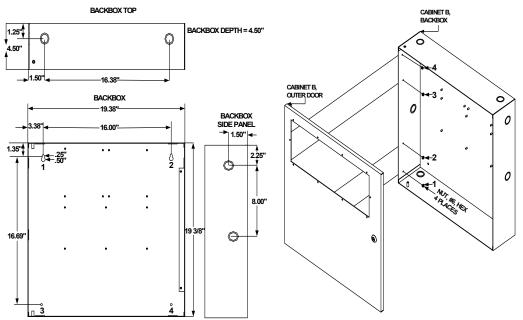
S3 Series, B-Size Cabinet Figure 2.16.1.2 S3 Series Cabinet B, Outer Dimensions Door to Backbox Installation
